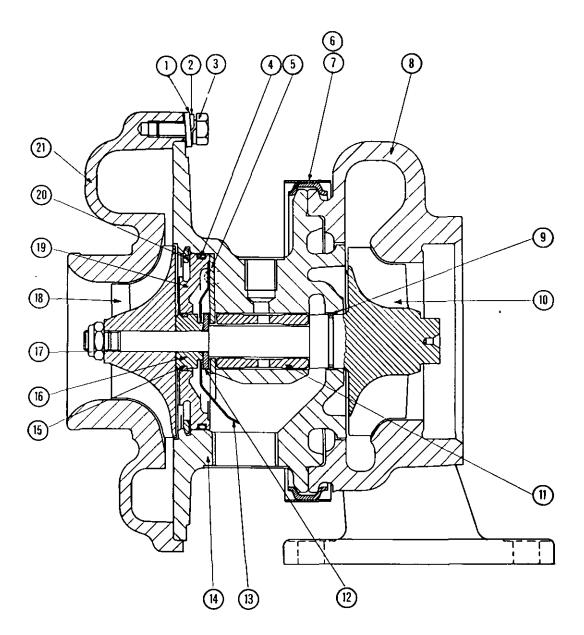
Sectional View of Typical Holset Model 3LD Turbocharger.
